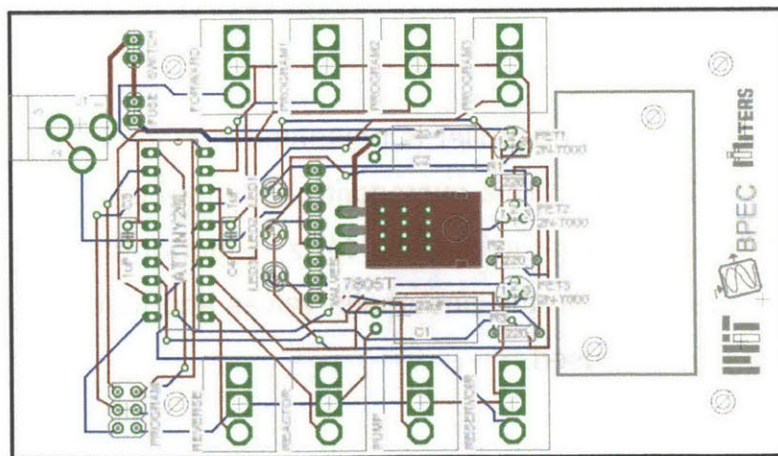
A CAD drawing of the controller printed circuit board. Red lines run along the top of the board and blue lines run underneath the board.
